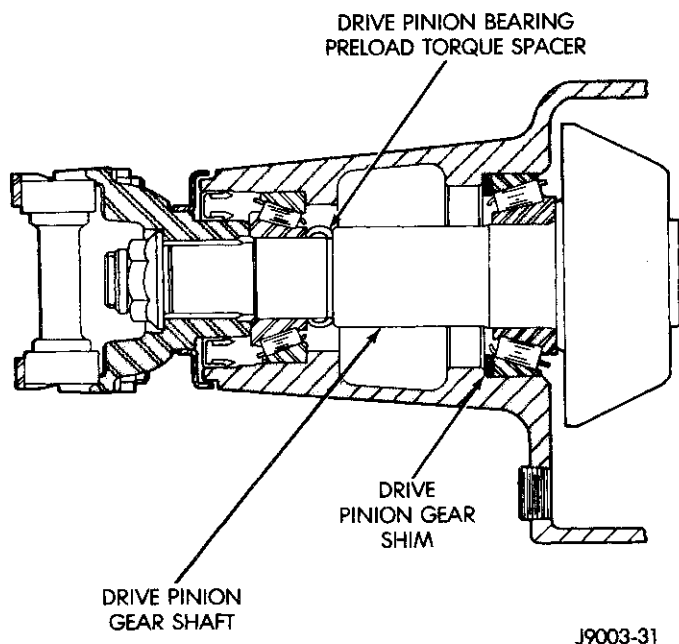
Drive Pinion Gear Shim & Preload Spacer
